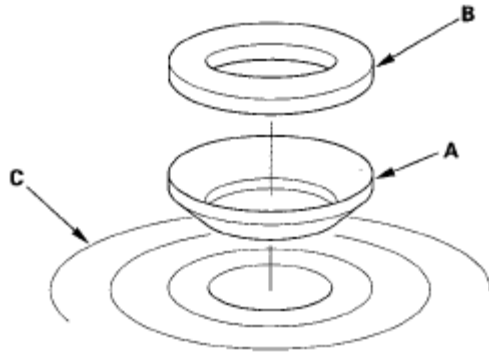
Identifying Spring Washer, Washer And Clutch Housing Side Bail Bearing
